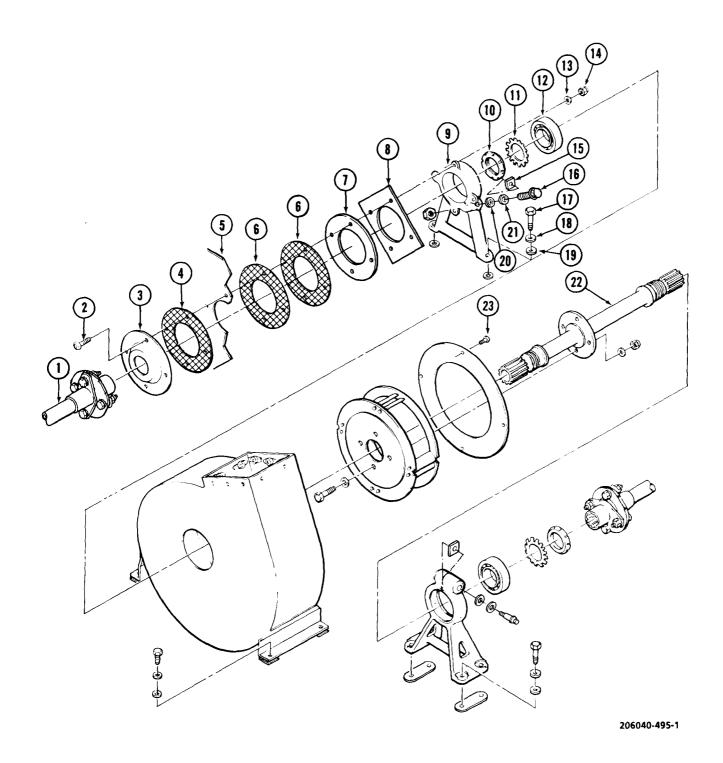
Oil Cooling Blower and Shaft Assembly (Sheet 1 of 3)
